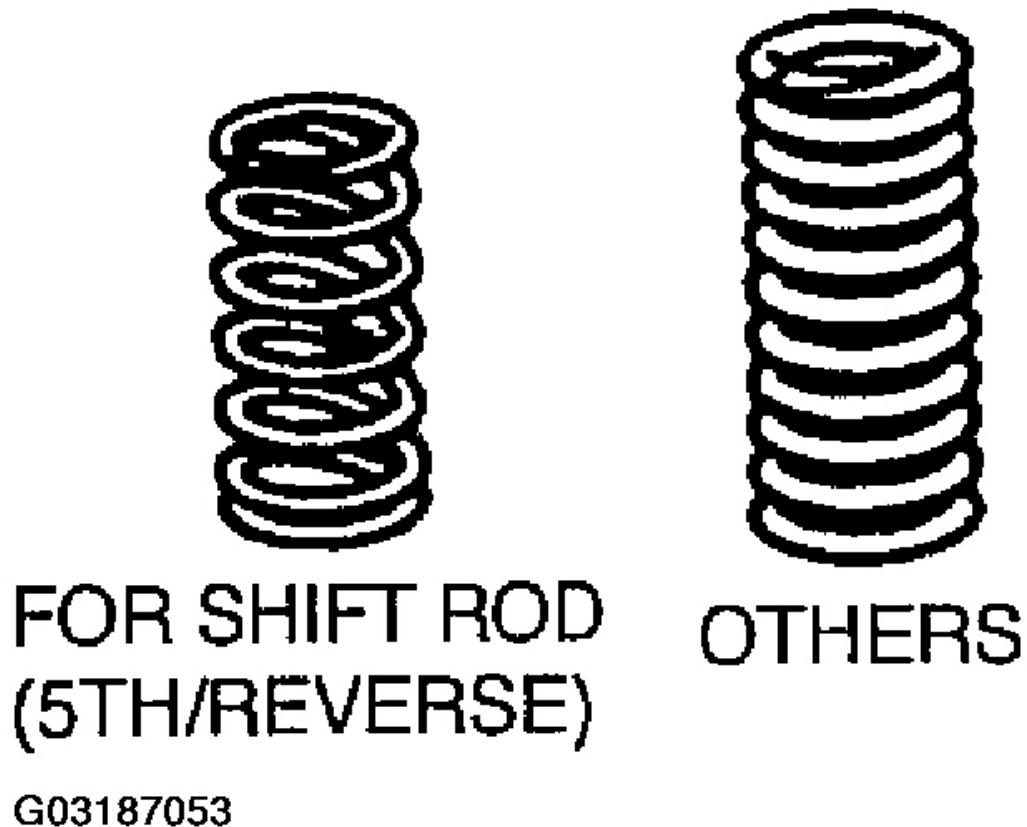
Identifying 5th/Reverse Shift Rod Spring
